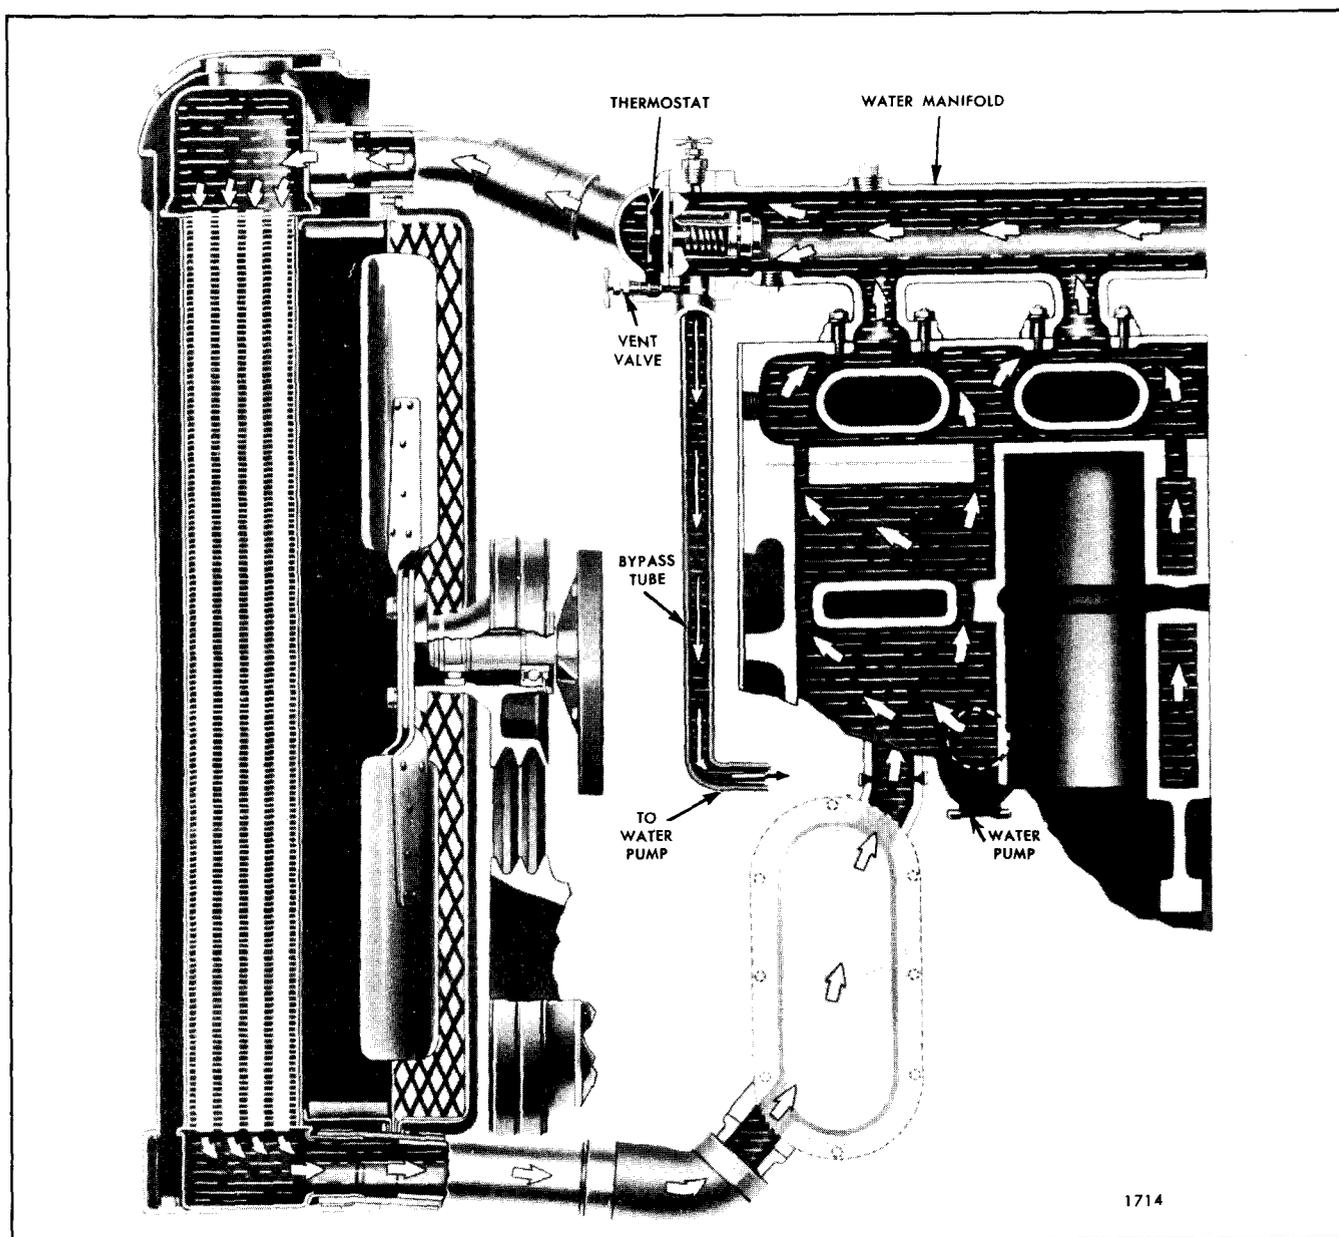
Typical Engine Cooling System with Radiator and Fan
